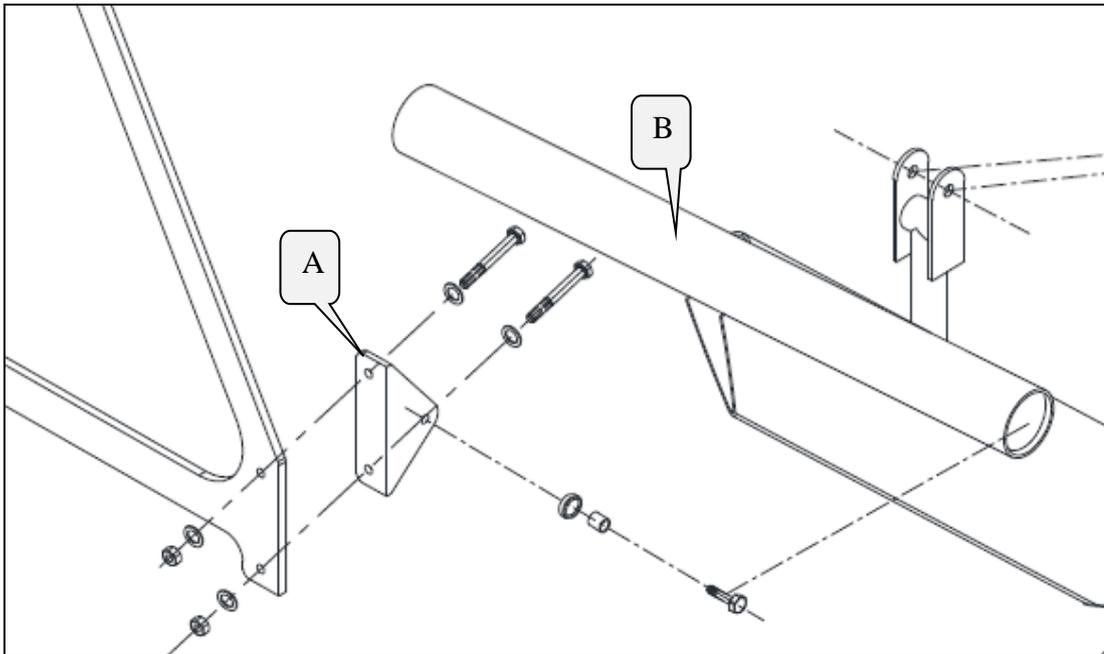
Scheme of the hard attachment of the nose landing gear angle flange (A) to the horizontal longitudinal axis (B) (AMM 32-30)
